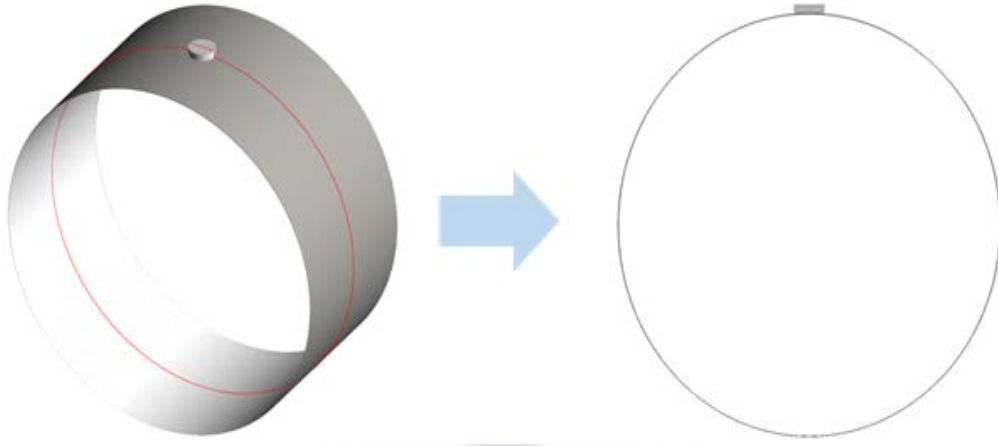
Plane view when projecting in the circumferential direction of the bearing
